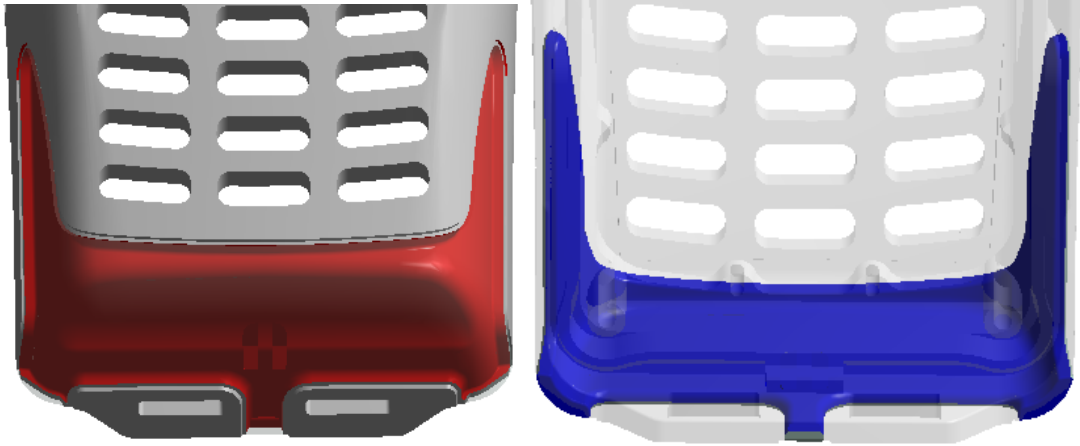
Face to face bonded condition between front panel (red) and front panel over-moulding (blue)
